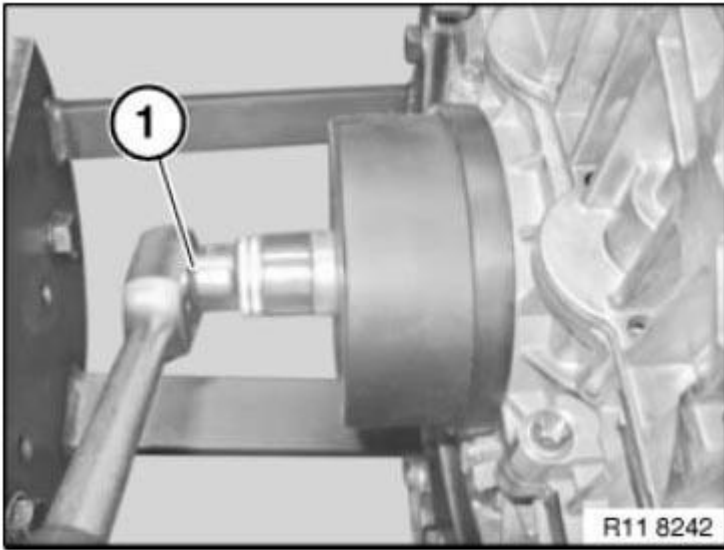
Connecting Special Tool 11 9 185 Onto Special Tool 11 9 181
